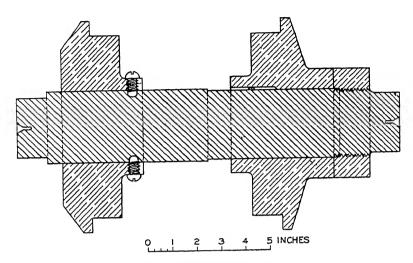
Horizontal Section of Mandrel used in Precise Turning of Spool.
